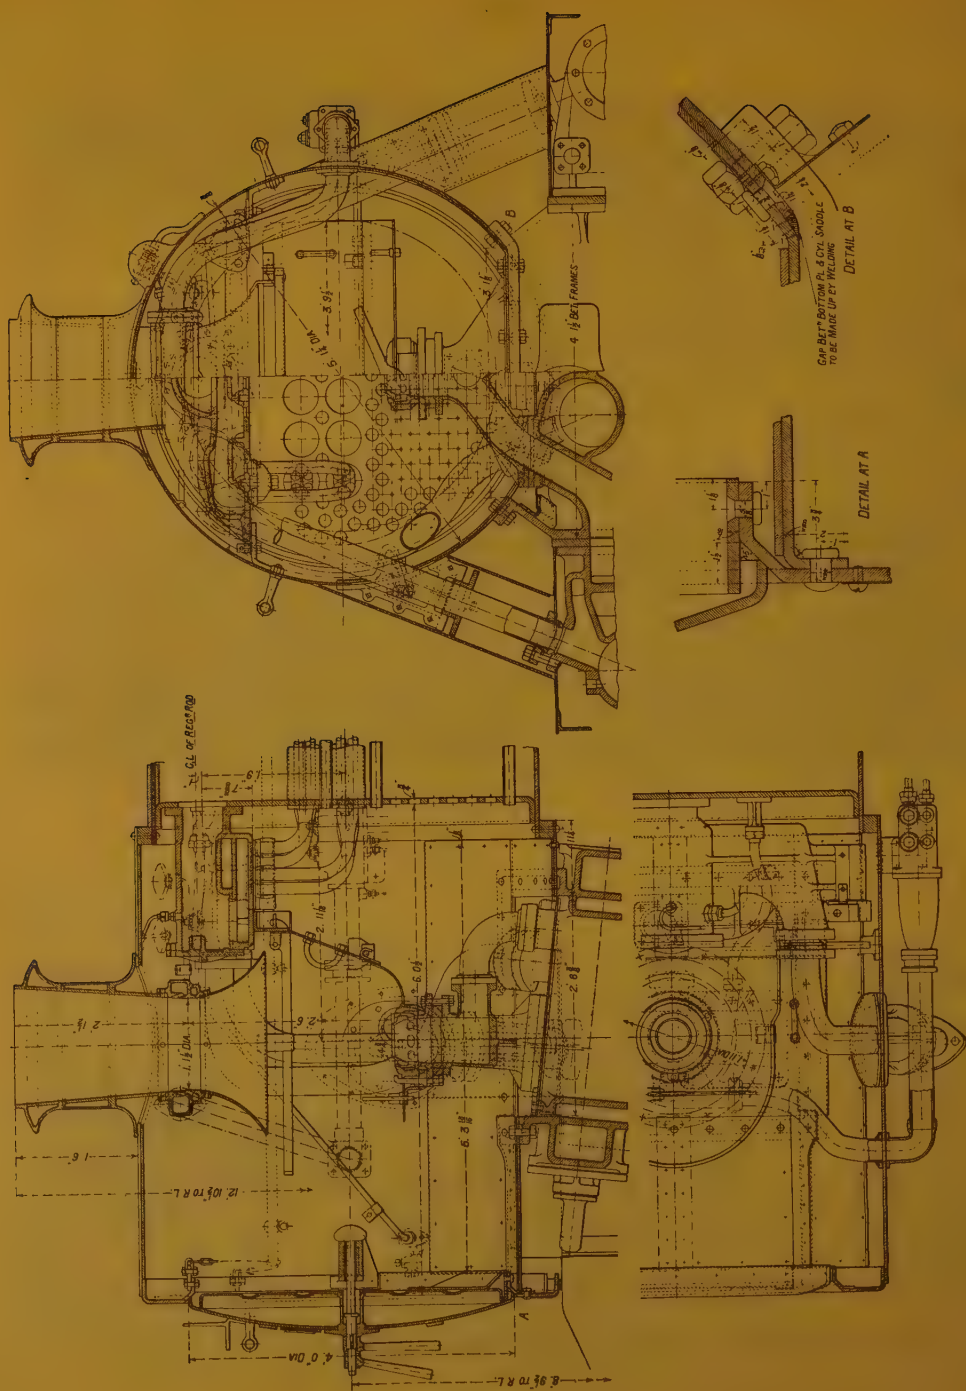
Details of the front end of the new L. M. S. R. three-cylinder tank locomotive. The careful design to reduce wire-drawing and back-pressure will be noted.
